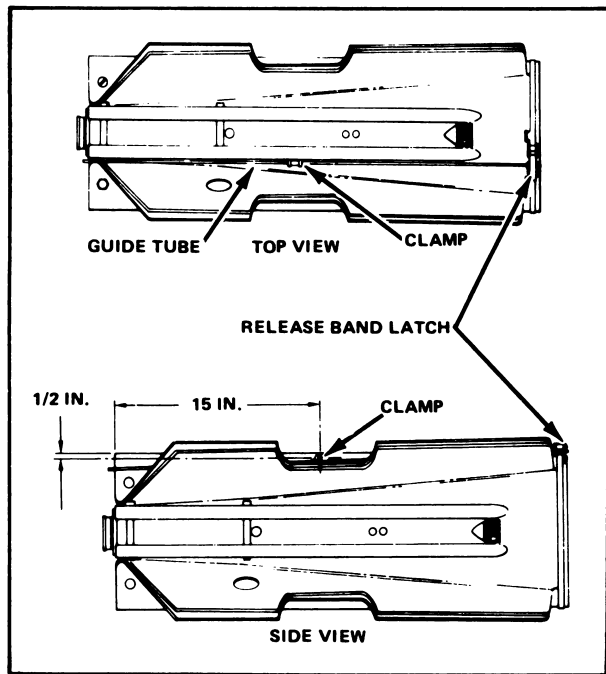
Installation of guide tube clamp (Mod 1 fin).
